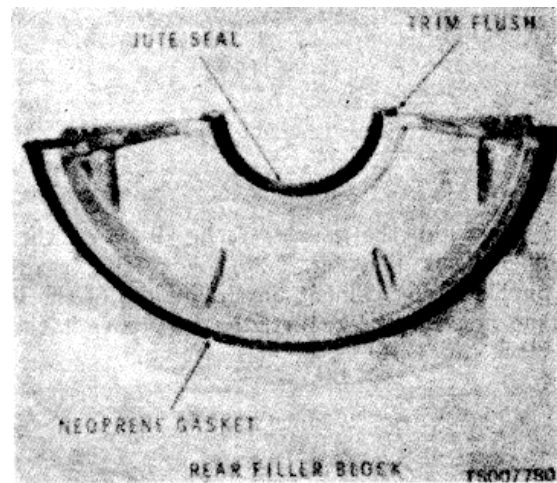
Lower Half of Ring Seal Installed in Rear Filler Block
